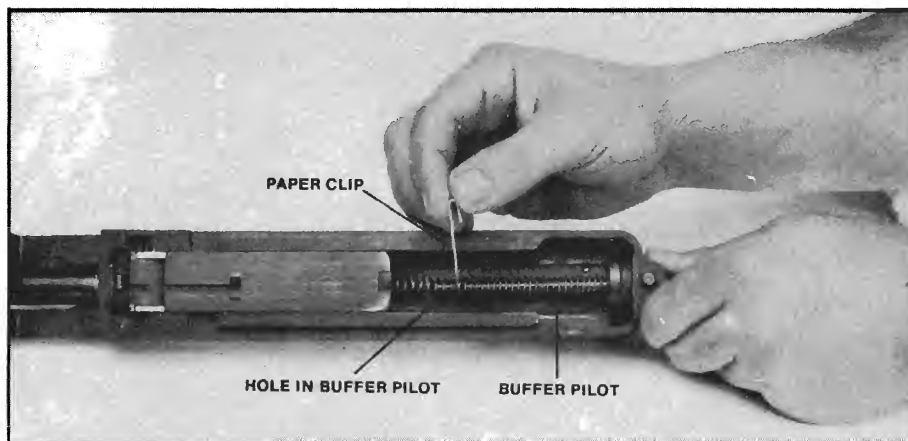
Using paper clip to hold compressed spring on buffer pilot.
